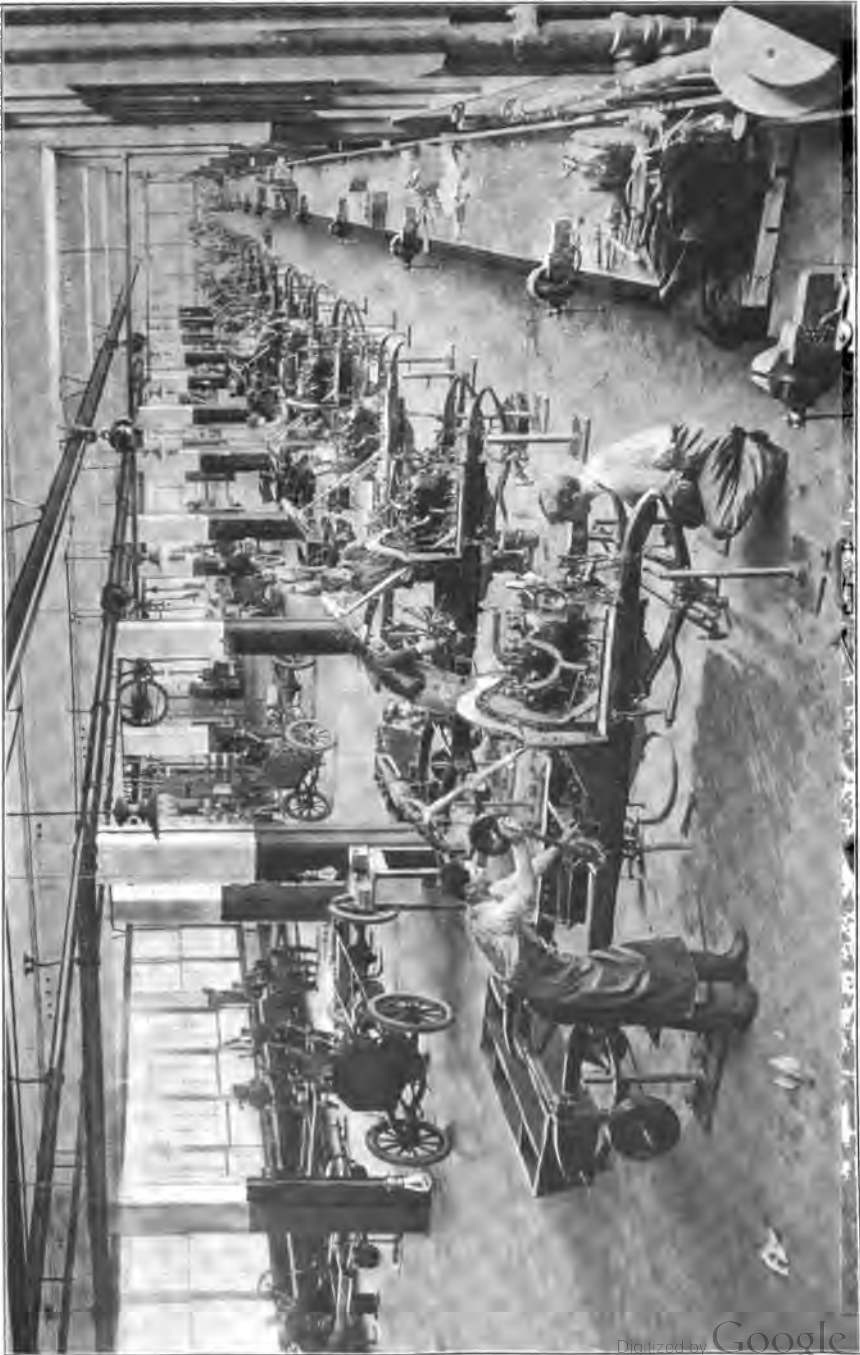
View of the Assembling Room, showing Arrangement of Overhead Track and Differential Hoists, the Trucks, each of which holds the Parts for Two Cars and the Adjustable Frame Supports
